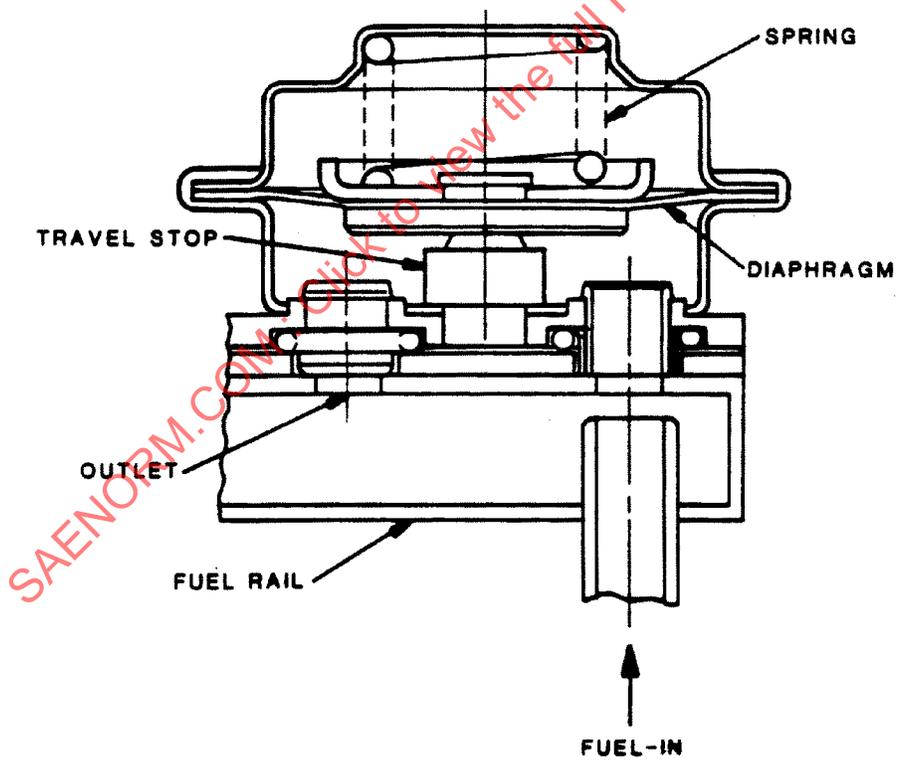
FUEL PRESSURE DAMPER (MECHANICAL SPRING)
